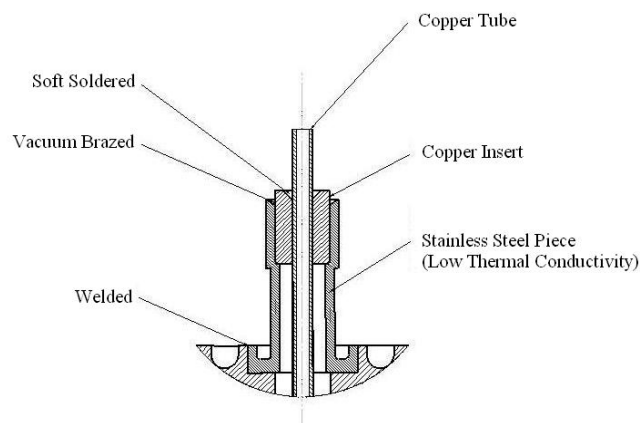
Welding joint between a thin walled pipe and a flange
